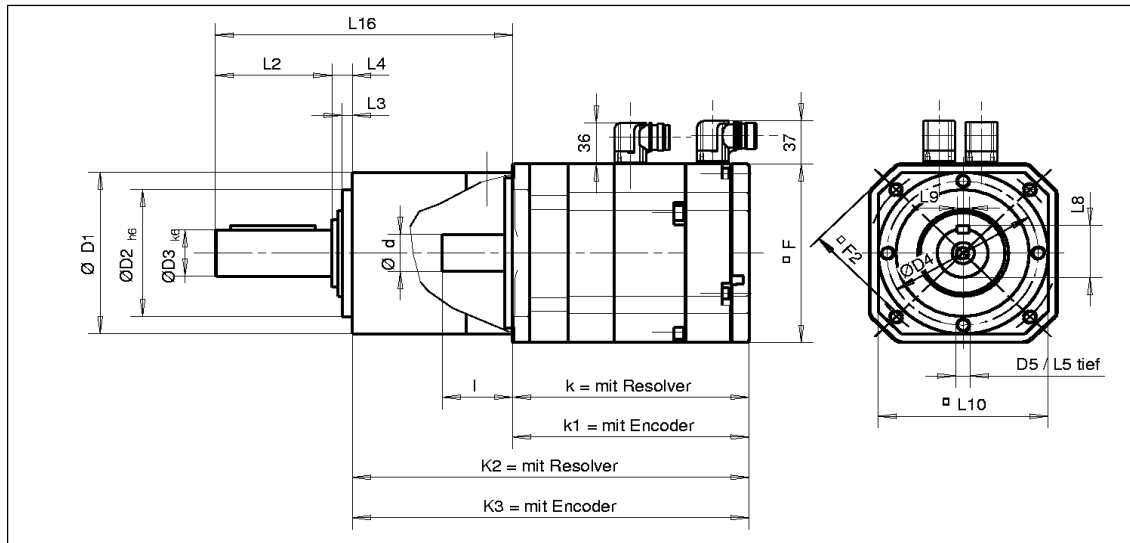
Dimensions, 1FK6 motors (shaft heights 36–80) with planetary gearboxes (alpha Company, LP series)
